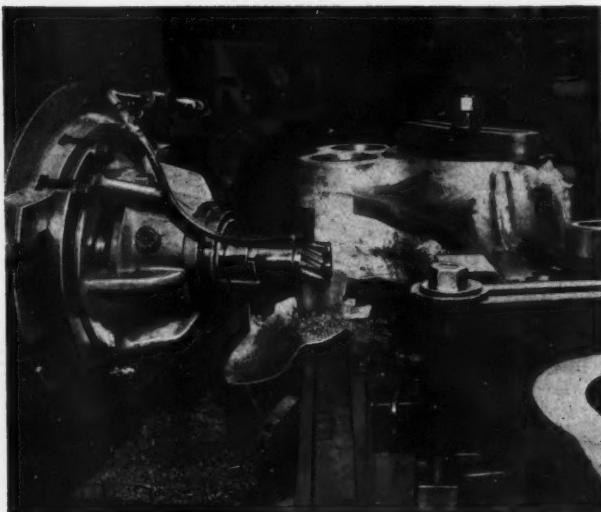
Heavy metal removal from the throat of a forged steel connecting rod is performed on this Craven horizontal boring and milling machine with a 3½-in. diameter Strasmann cutter
